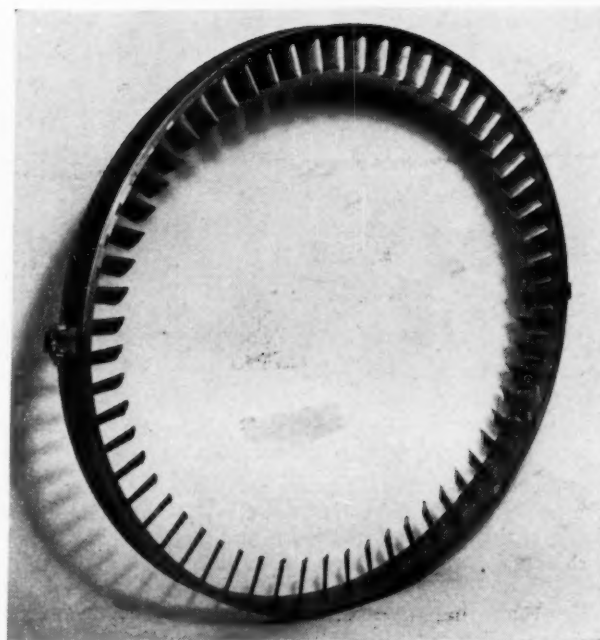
COMPRESSOR STATOR-RING ASSEMBLY
